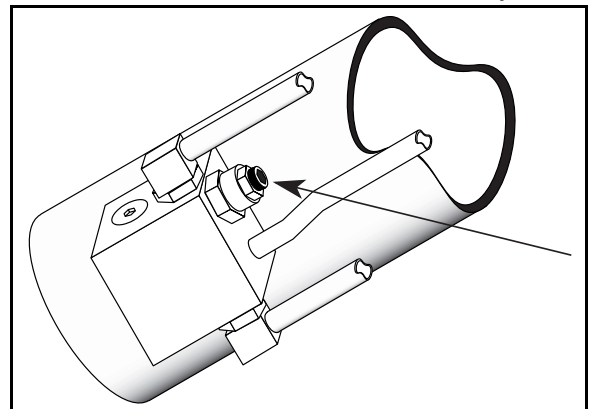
Boom Extend Counterbalance Valve, view from rear of boom with cover removed
